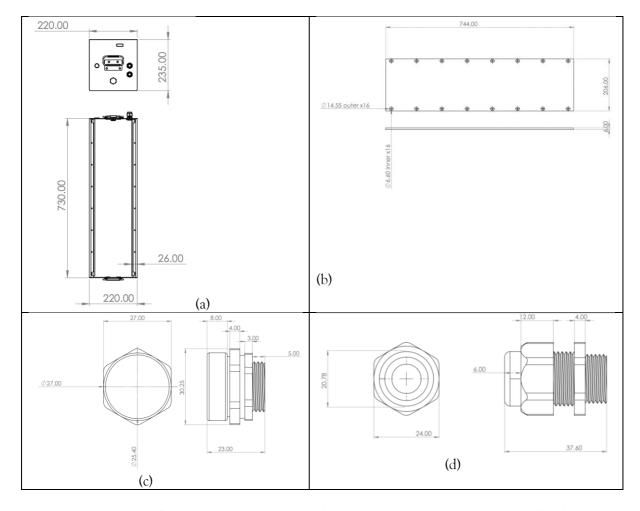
Dimensions of the battery pack (in mm) - a) Battery pack outer casing with handle, b) Battery pack top plate, c) Battery pack vent, d) PG 11 - Cable Gland
